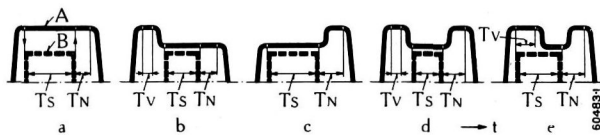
The five automatically controlled welding cycles of the Brown Boveri welder shown in Fig. 83, which can be selected arbitrarily.
